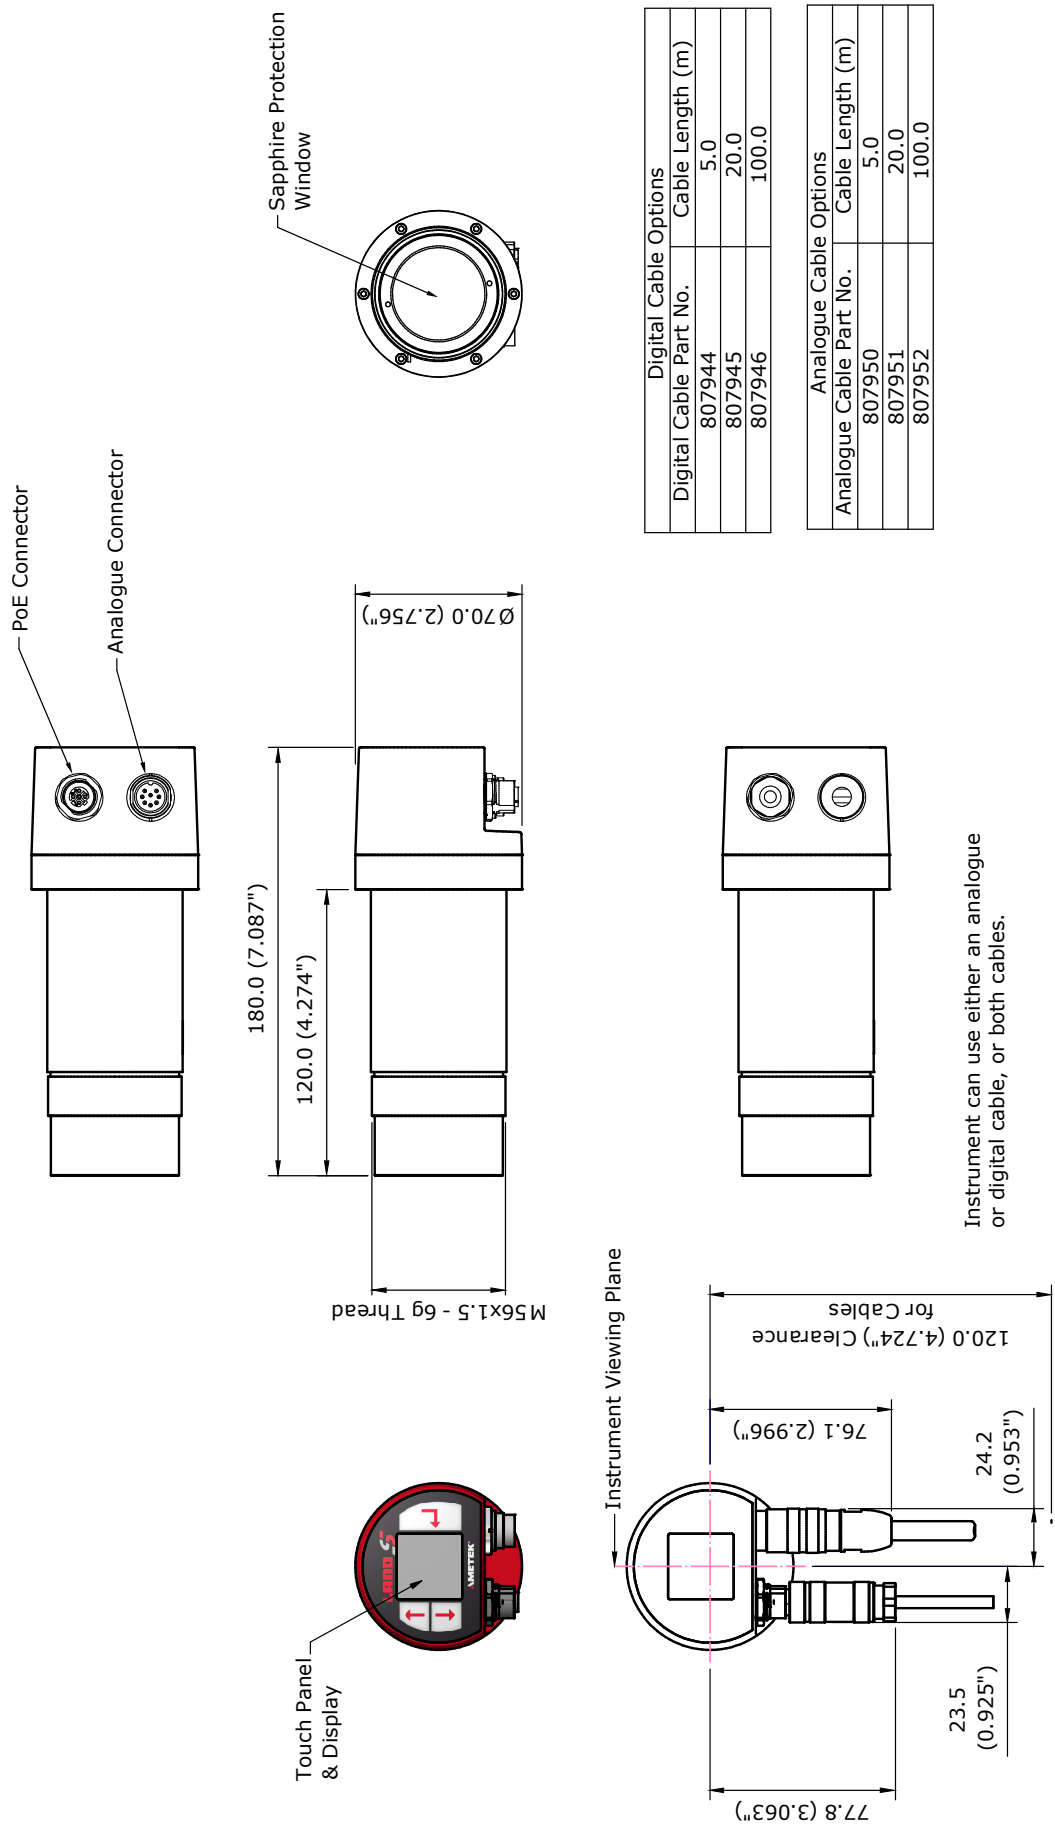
SPOT+ Thermometer Installation Dimensions (*standard bodied thermometer)
